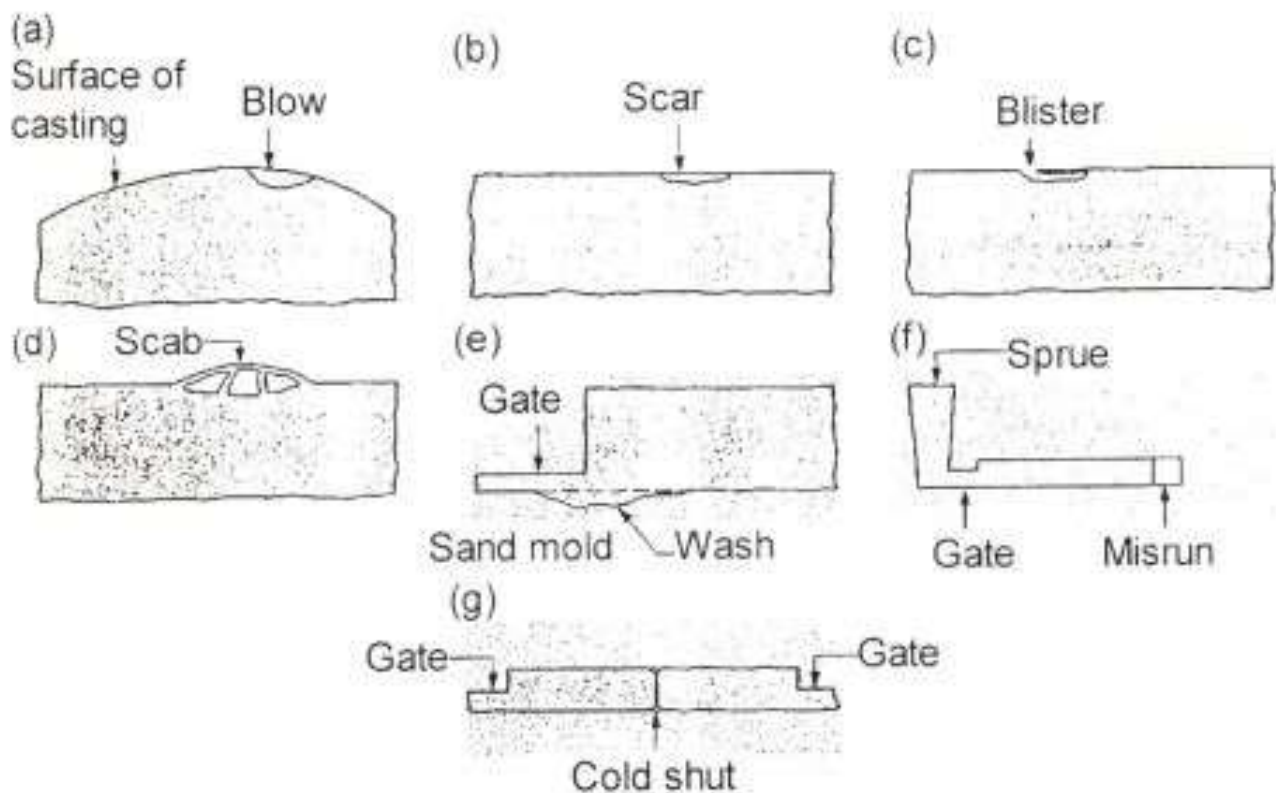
Examples of common defects in casting. These defects can be minimized or eliminated by proper design and preparation of molds and control of pouring procedure
